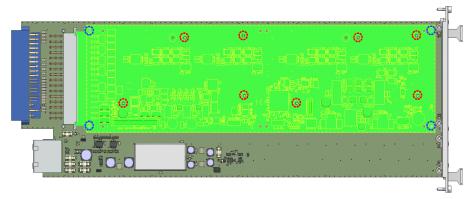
Position of the drilled holes on the ES5372.1-B with installed ES4455.2
